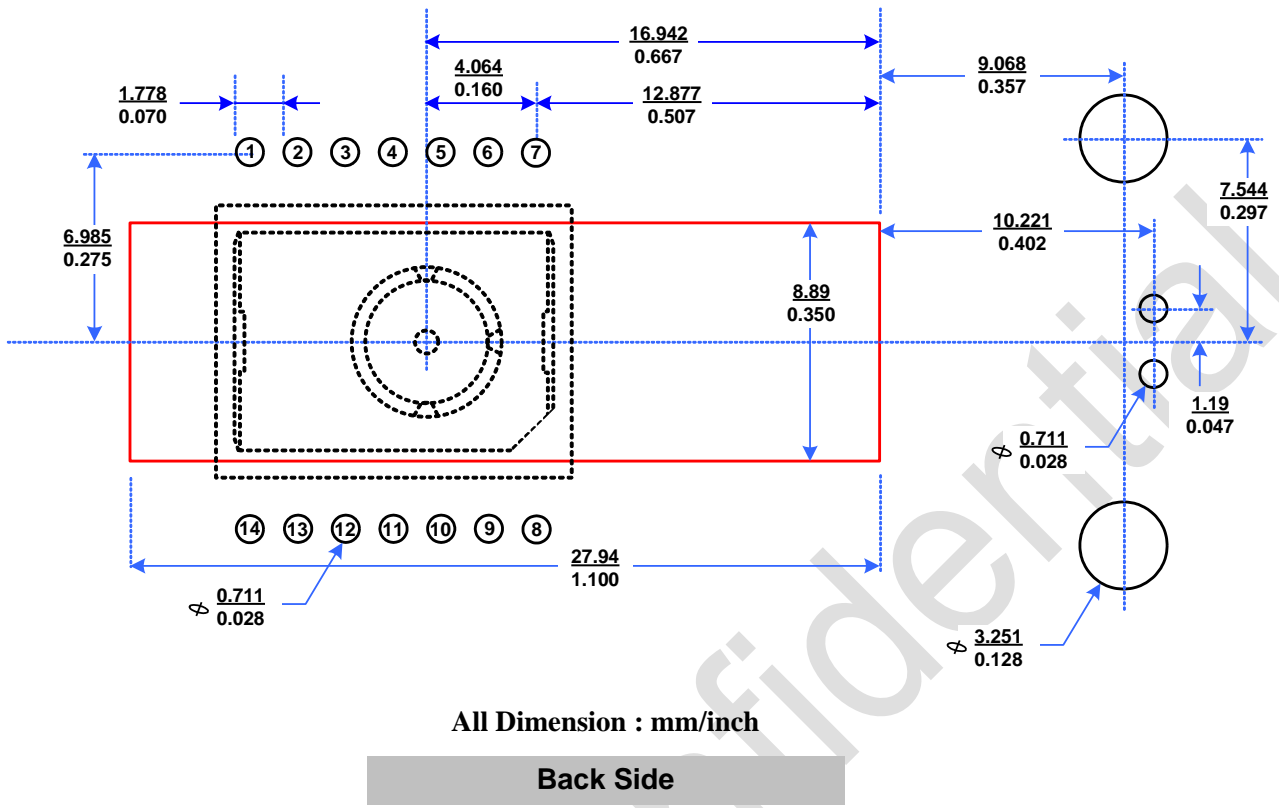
Recommended PCB Mechanical Cutouts and Spacing
